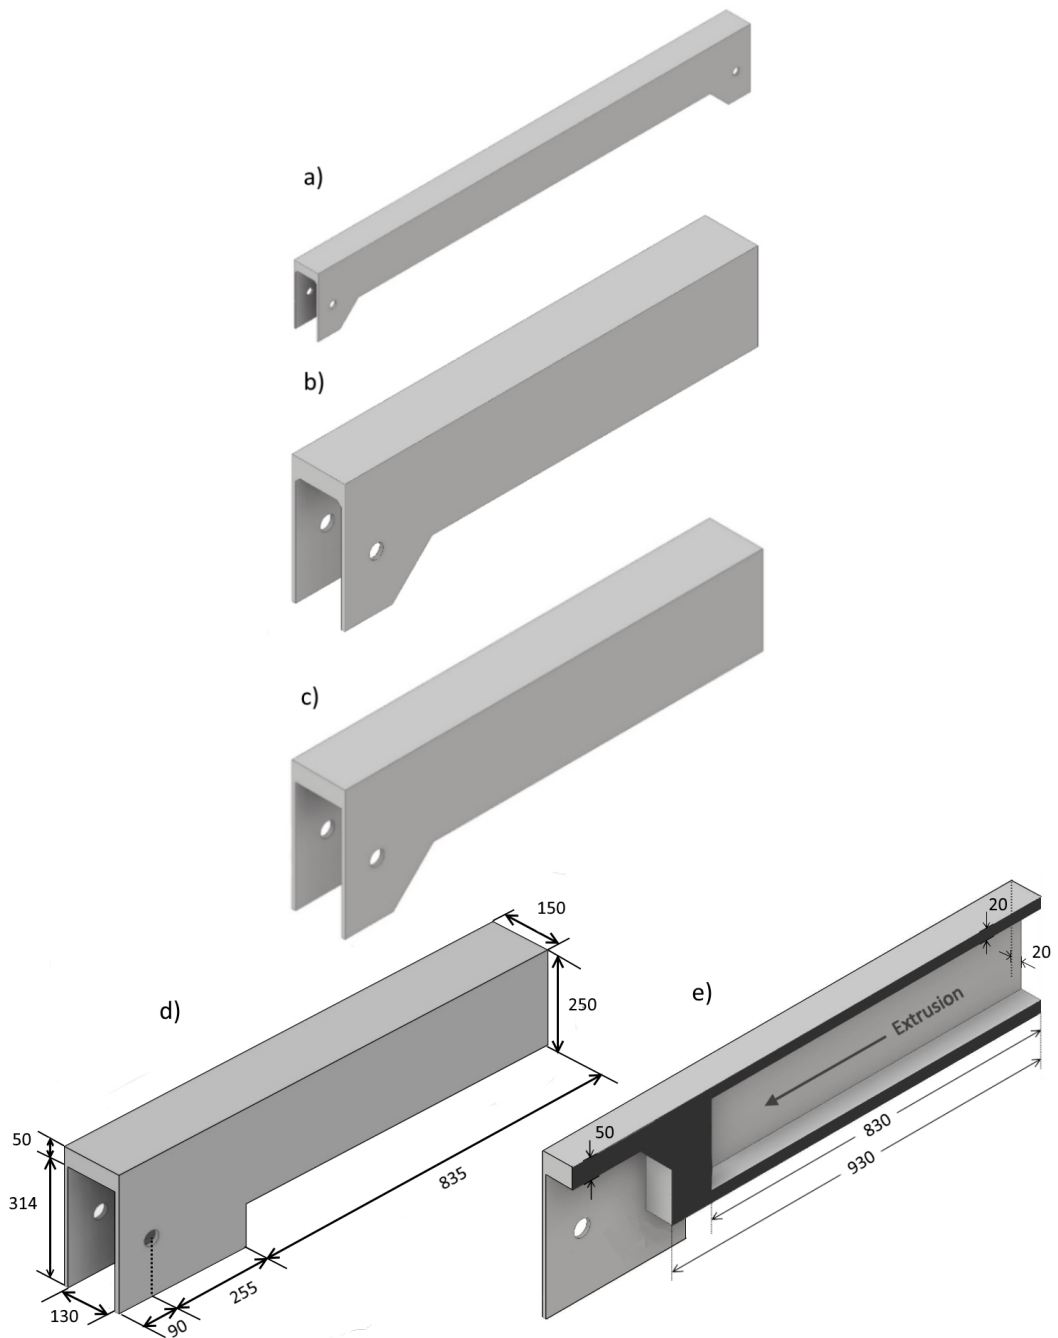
Draft of design space: a) 1st draft; b) 2nd draft, improved computational demand by exploiting symmetry; c) 3rd draft, removed chamfered edges to allow meshing with hexagon elements; d) 4th and final draft, side skirts were expanded after preliminary analysis indicated a need for more freedom in material distribution in these areas; e) Slice of model at YZ-plane.
